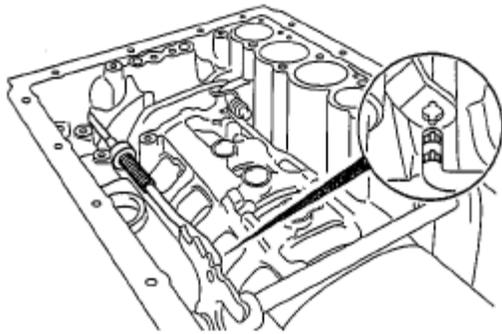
Identifying Driven Plate, Parking Pawl Shaft And Parking Pawl
